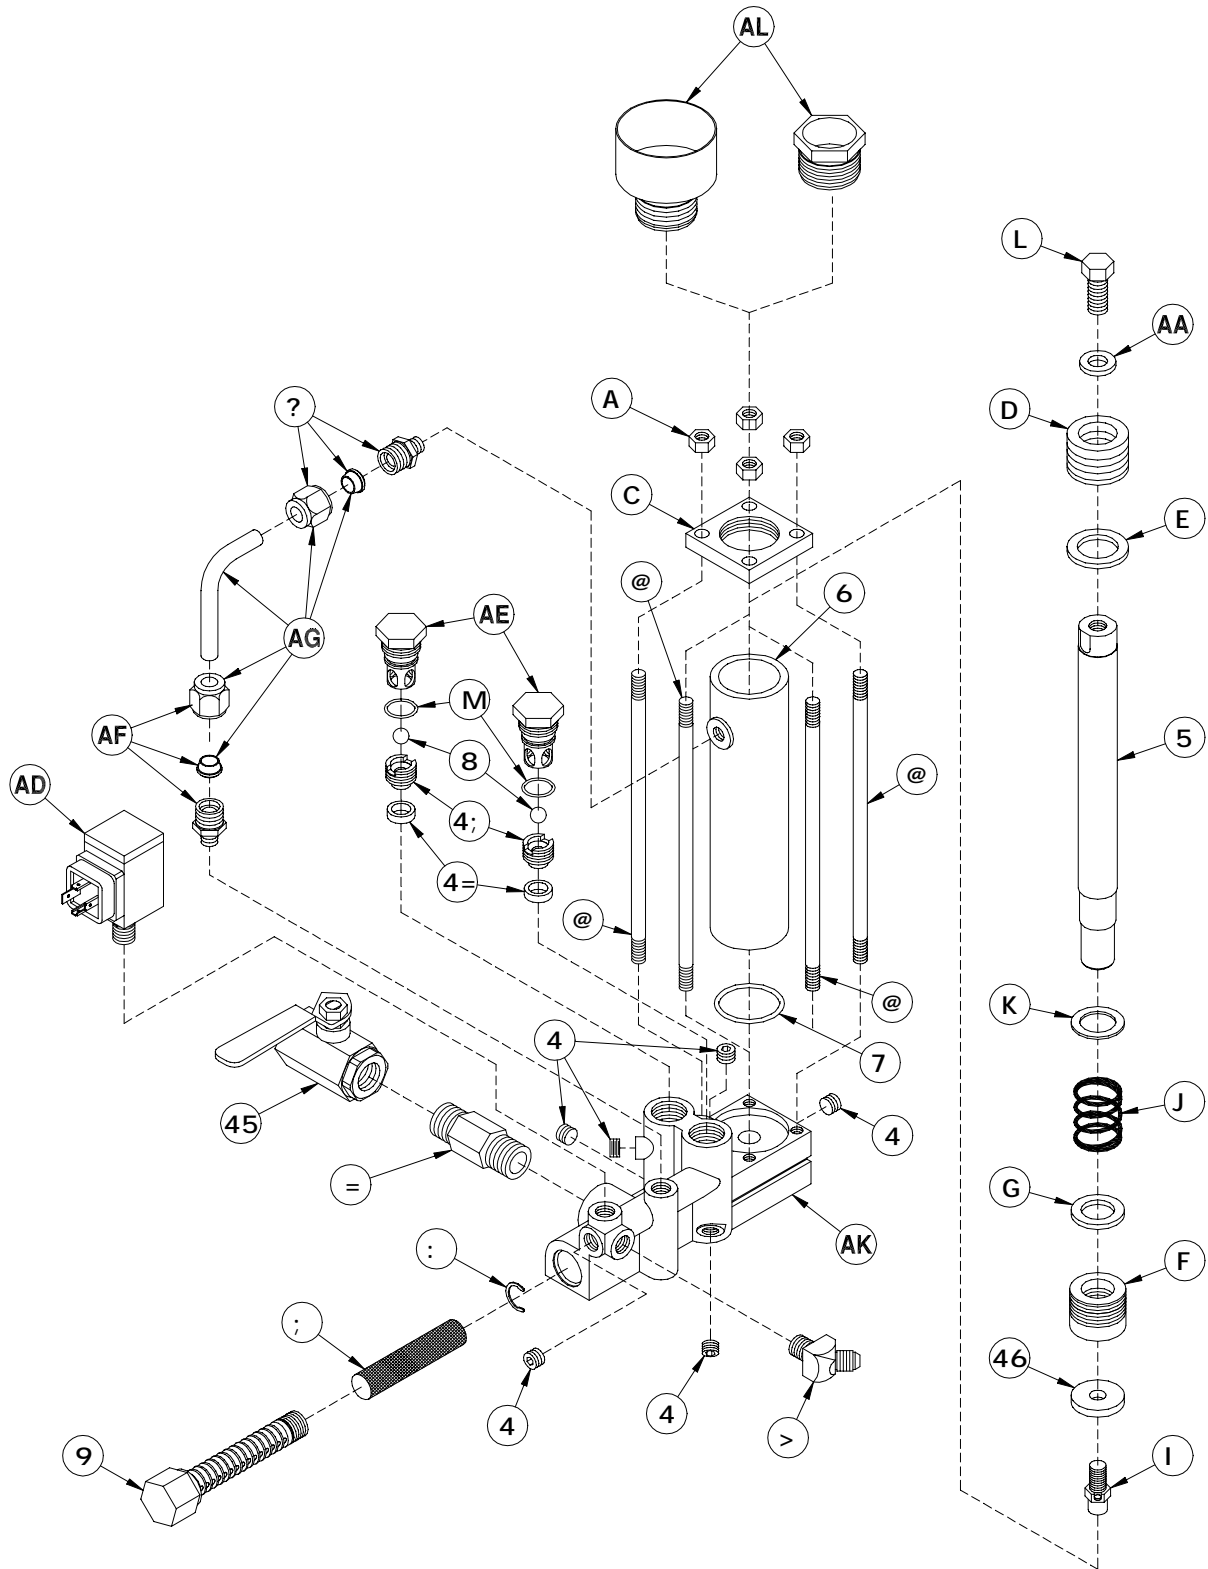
Proportioning Pump (Part No. 57400-SIZE and 57450-SIZE), Exploded View
